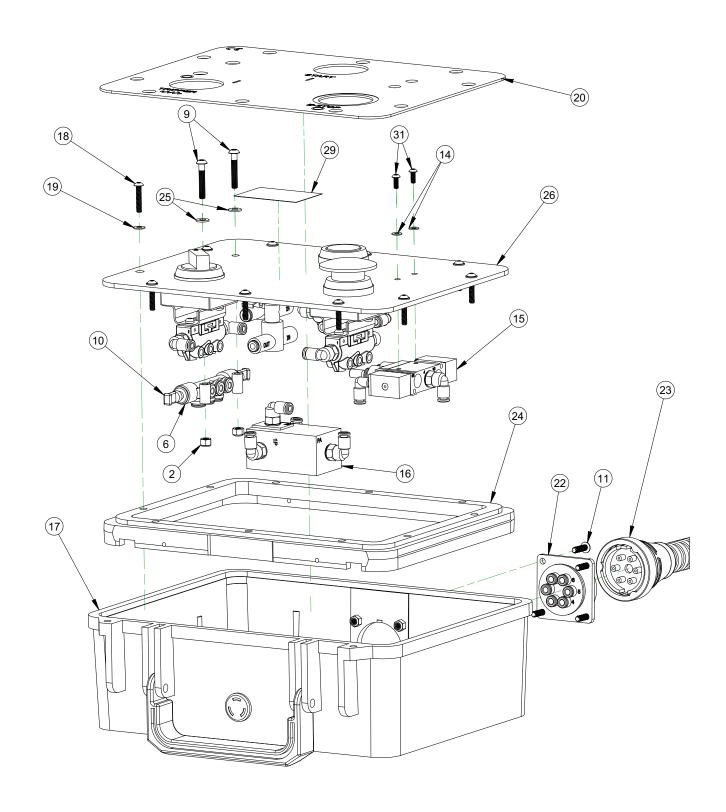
OPERATOR PENDANT ASSEMBLY 1 (P/N 96374)
